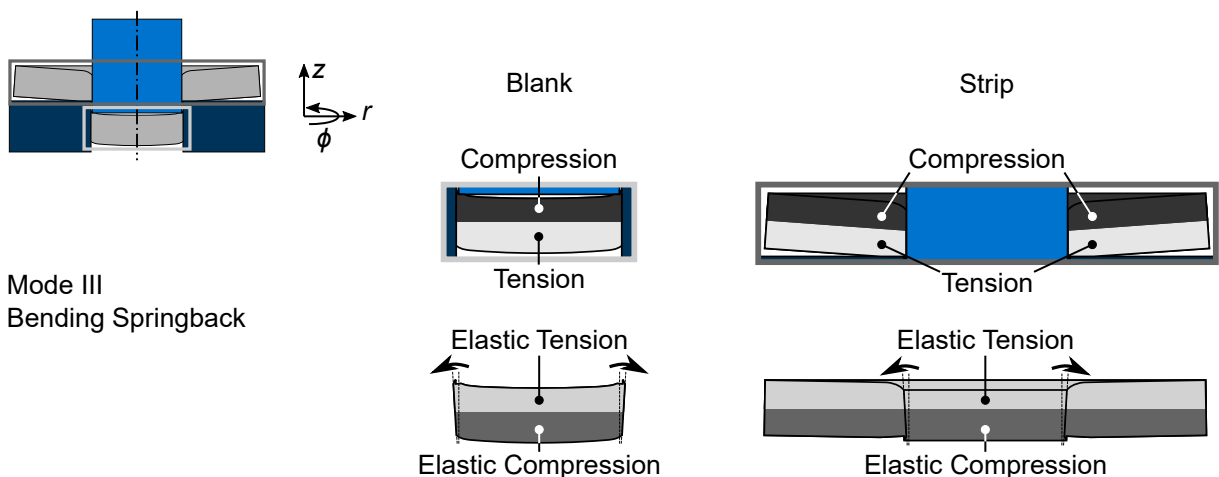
Bending springback mode of parts produced by a rotation-symmetric closed cut without the formation of a fracture zone.
